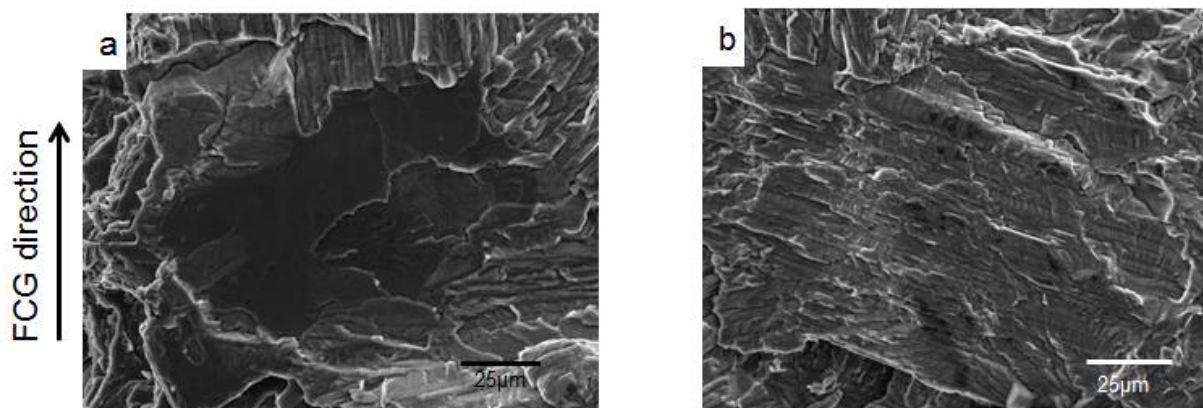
Two major fracture modes of the fracture of gamma TiAl alloys: (a) interlamellar fracture; and (b) translamellar fracture.
